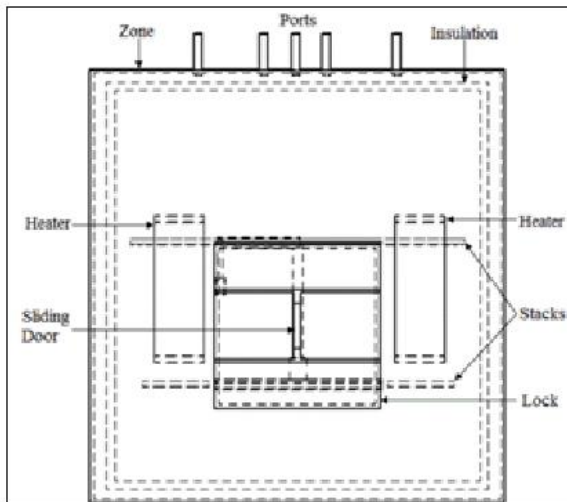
Right View of a Cylindrical Zone with a Lock on either side (in forefront)
